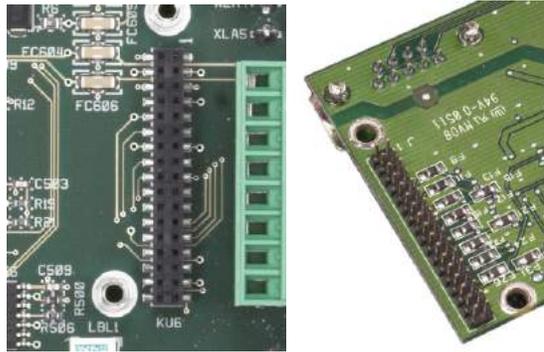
PLC Interface Module Socket on Main PCB (left) and Connector Pins on the Underside of a Module (right)
